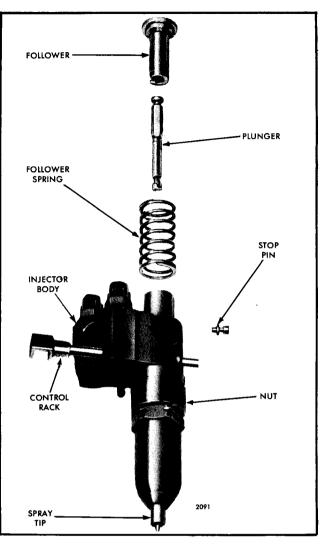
· Injector Plunger, Follower and Relative Location of Parts
